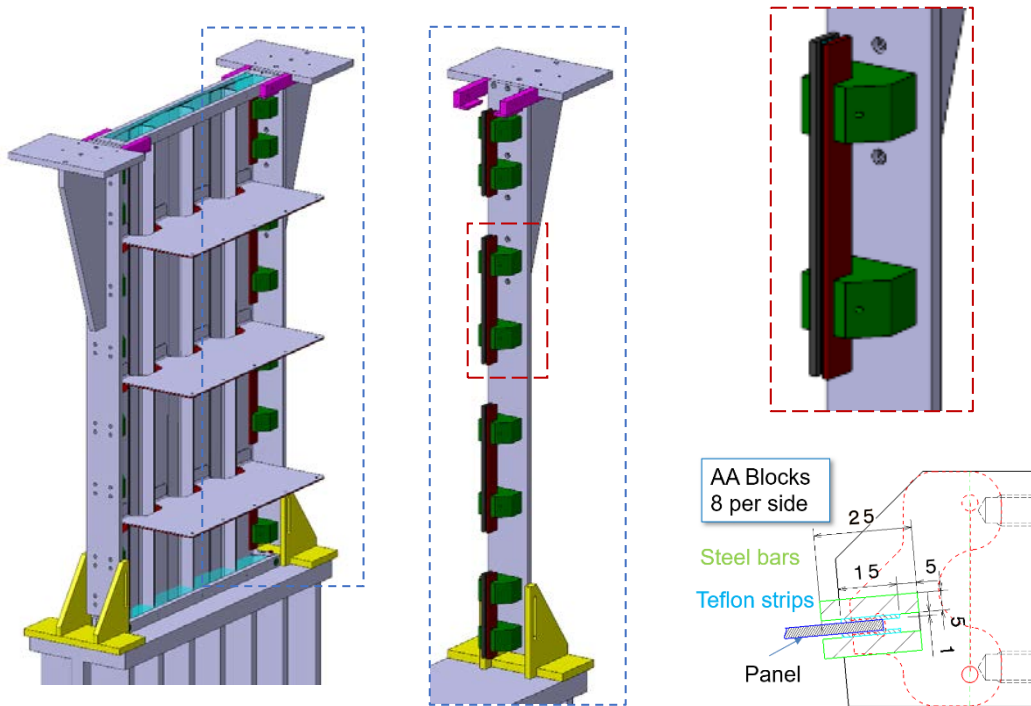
Concept and three-dimensional drawings for the side supports.
